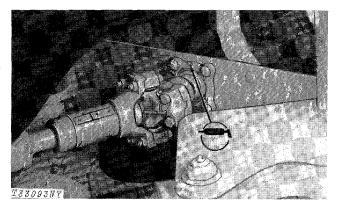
Front Drive Shaft Support Bearing (1 Point)
